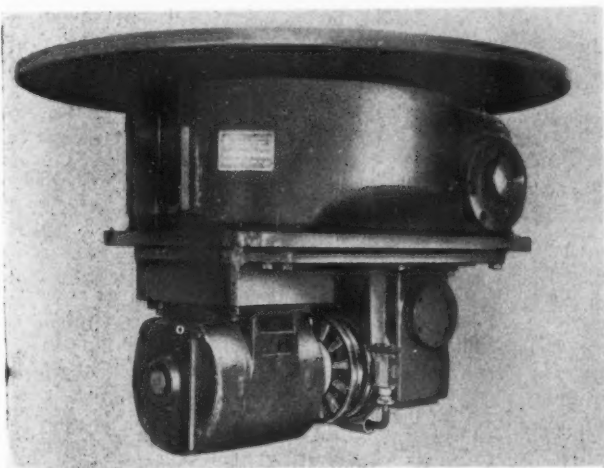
A High-speed Indexing Table with a Standard Power Assembly. A Magnetic Clutch-brake Unit is Provided Between the Motor at the Left and the Gear-reduction Unit at the Right
